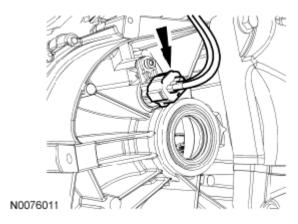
Locating Vehicle Speed Sensor Electrical Connector
